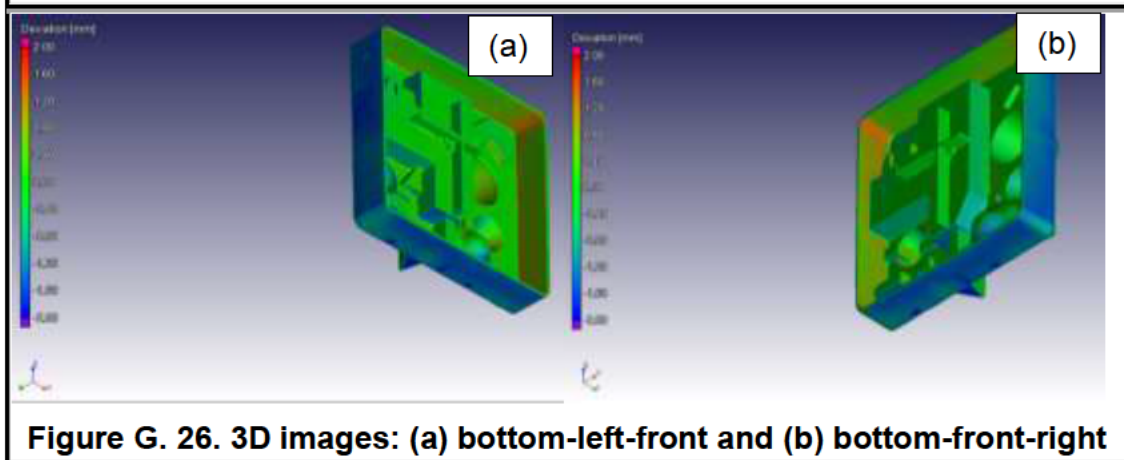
3D images: (a) bottom-left-front and (b) bottom-front-right
